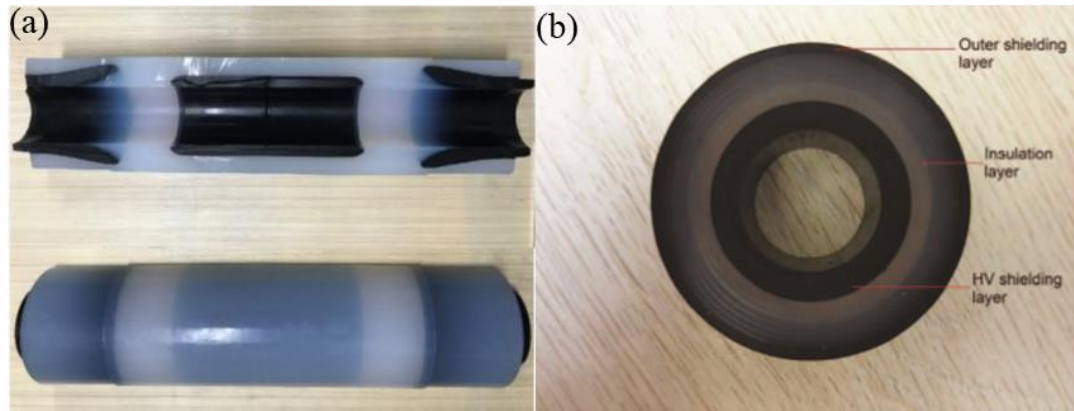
a) Joint tube [81]. b) Cross section of a joint tube [80].
